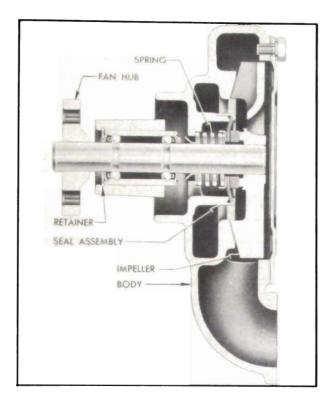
Sectional View of First Type Water Pump— 1948 Engines
